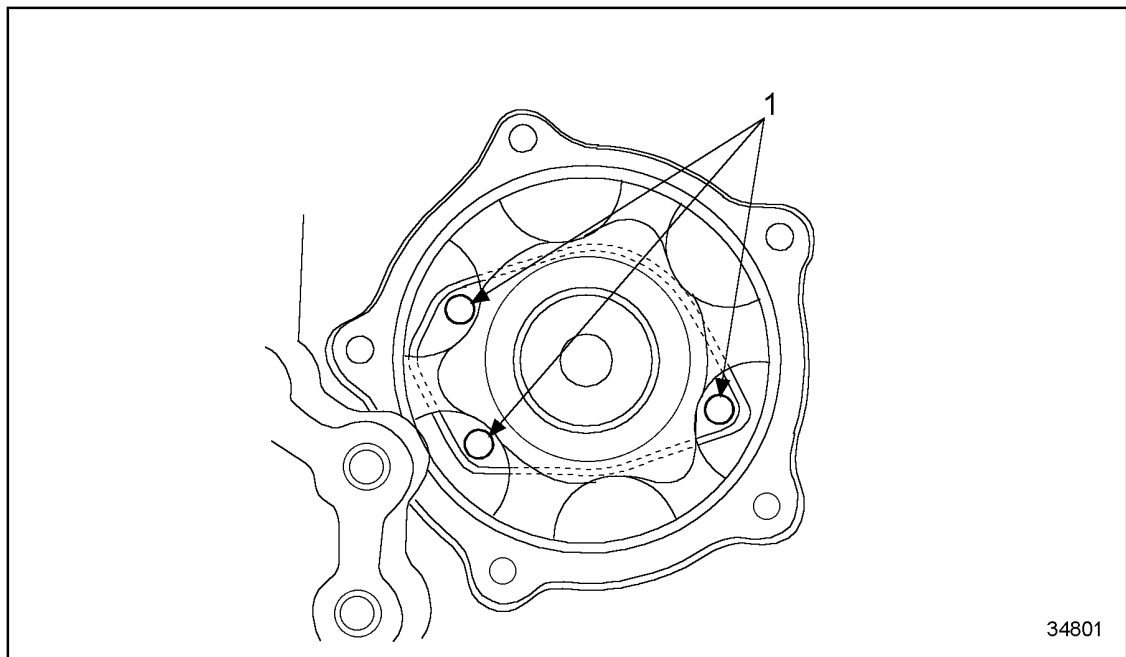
Camshaft Drive Gear Torque Holding Tool Installation
